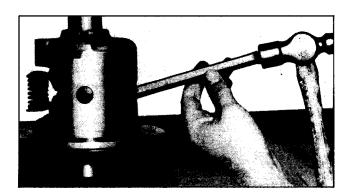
D-4 Partial Removal of Preload Springs and Retainers
